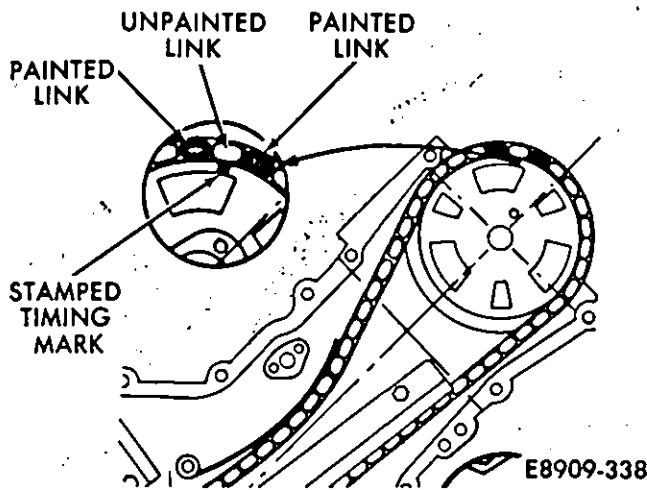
Left Camshaft Sprocket to Timing Chain Alignment
